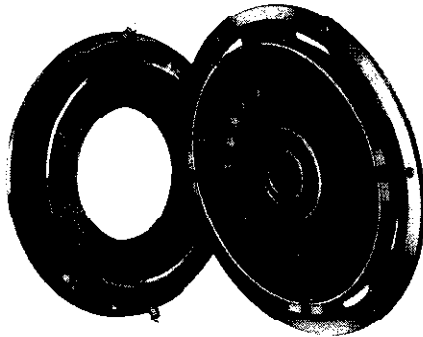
Illustration No. 32—Clutch Lever and Plate Assembly J-25 and J-30 Models
